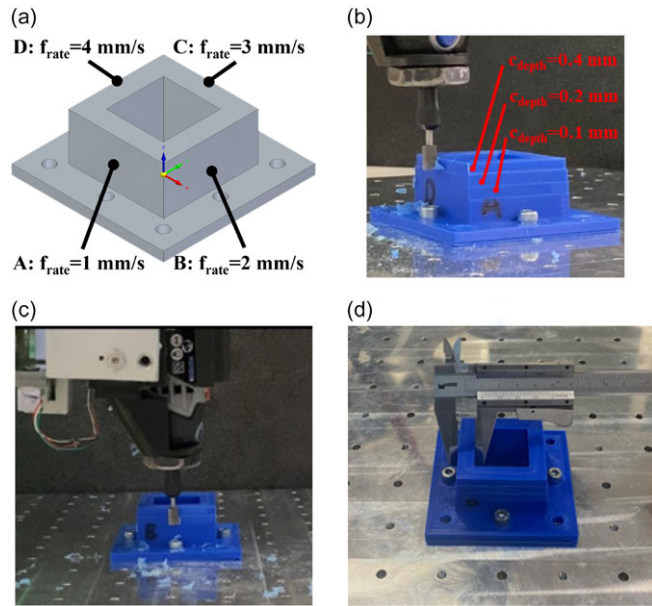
(a) 3D CAD model of the specimen for preliminary contouring tests; (b) front view of milling; (c) side view of milling; (d) measurement of the effective c_{depth} after the contouring machining.
